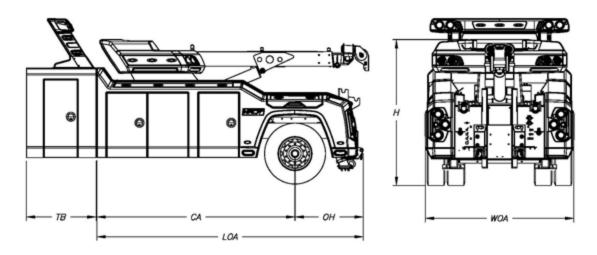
CHASSIS DIMENSIONS (EXAMPLE)
